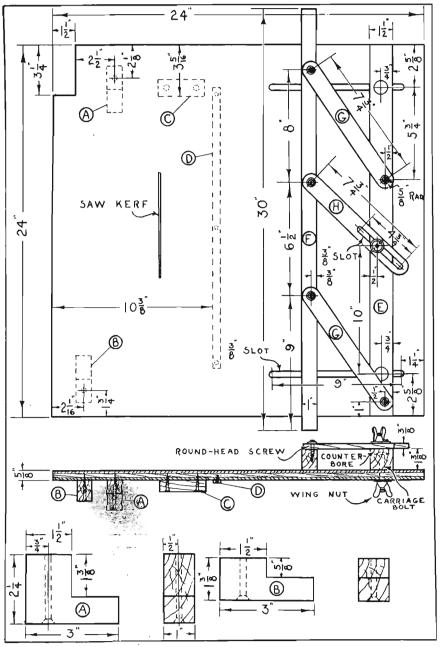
Using Auxiliary Table to Rip Wide Boards
